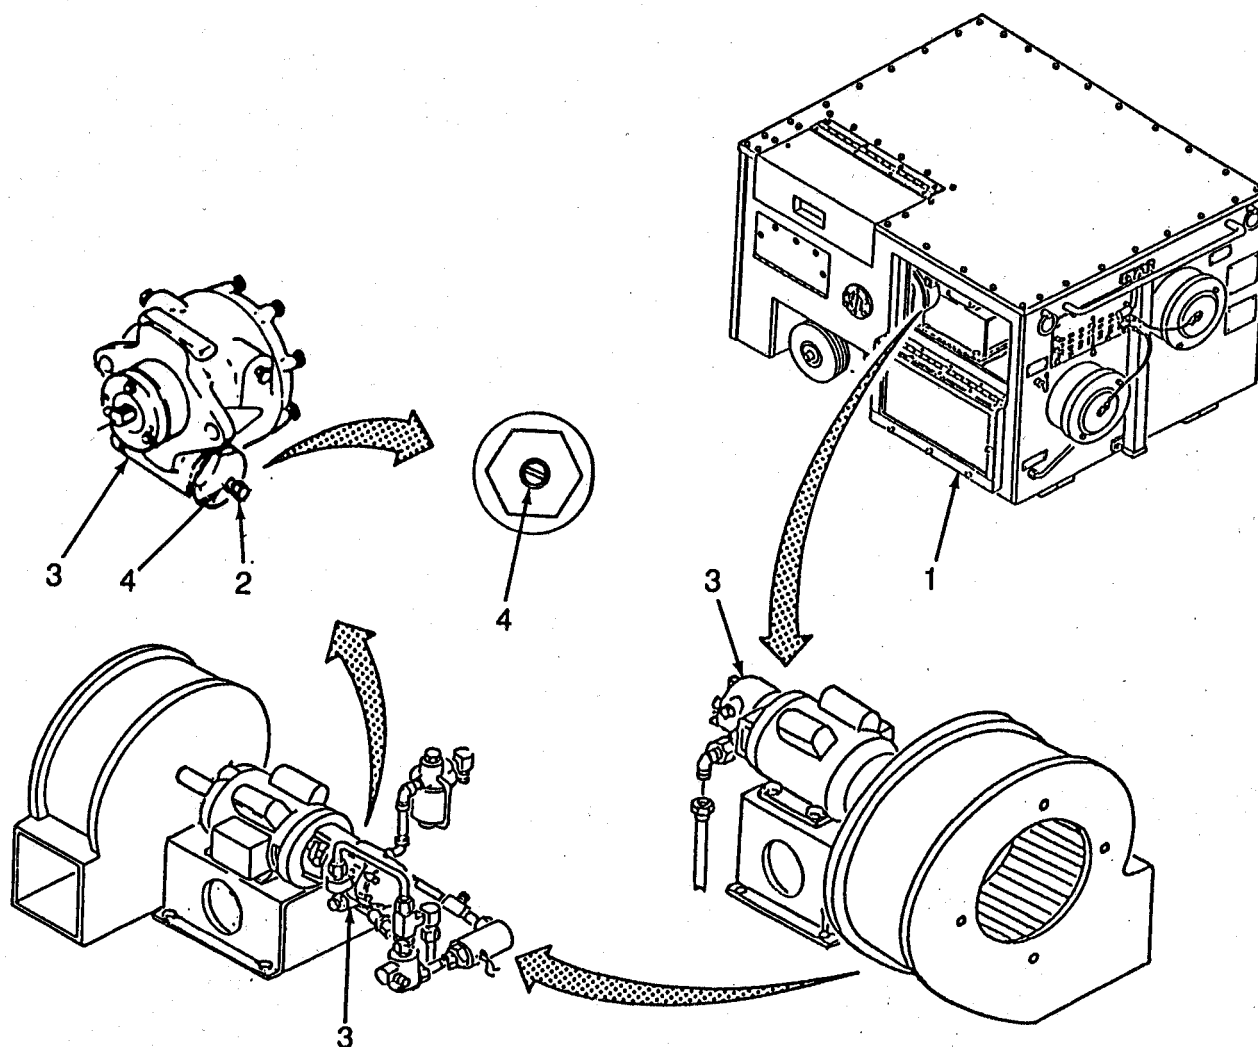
Fuel Pump and Solenoid Valve Installation (Sheet 2 of 2)
